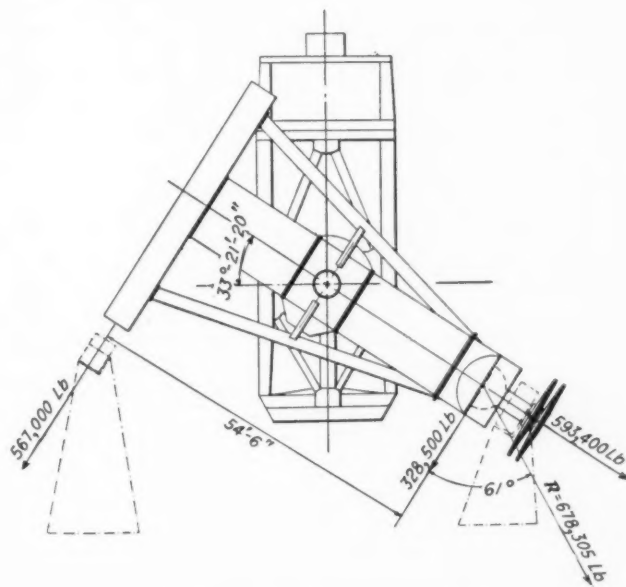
200-IN. TELESCOPE BEARING LOADS
